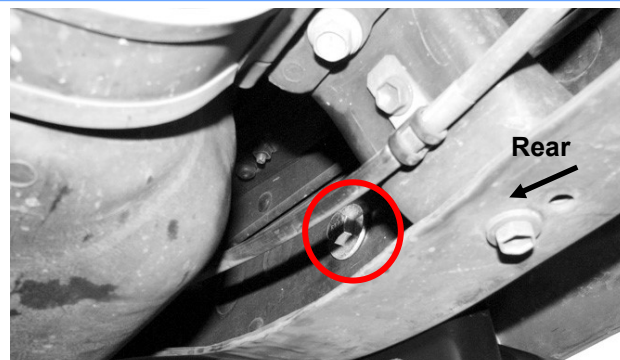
Driver Front Mounting Bracket (DFM) Installation
